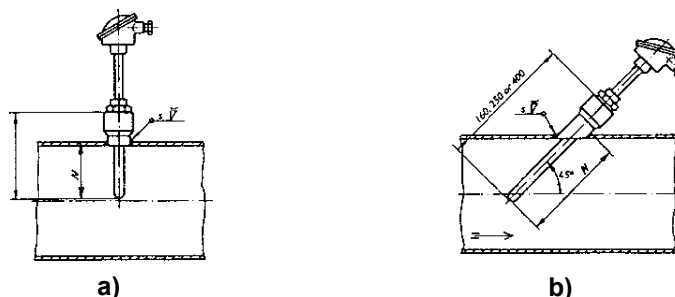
shows the different positions of the mounting boss. Sensor or thermometer is usually mounted perpendicularly (a). If dimension N is greater than 3/4 of the pipe diameter, position b will be used.
